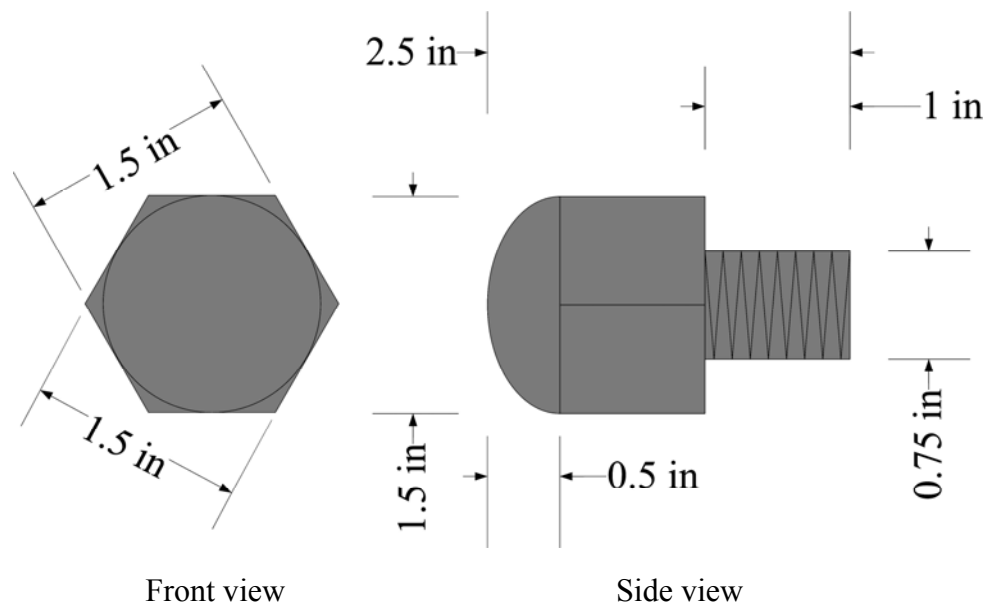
Half spherical bolt use for transmit compressive load from cantilever beam to lateral load platen.
